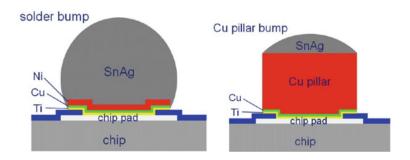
Schematic drawing of a conventional solder bump and a copper pillar with solder cap [28].
